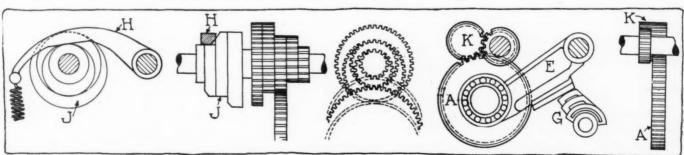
Center, how master gear meshes with countershaft gears. Fig. 4—Left of center, countershaft assembly, showing eccentrics and arm. Fig. 5—Right of center, reverse gear train
